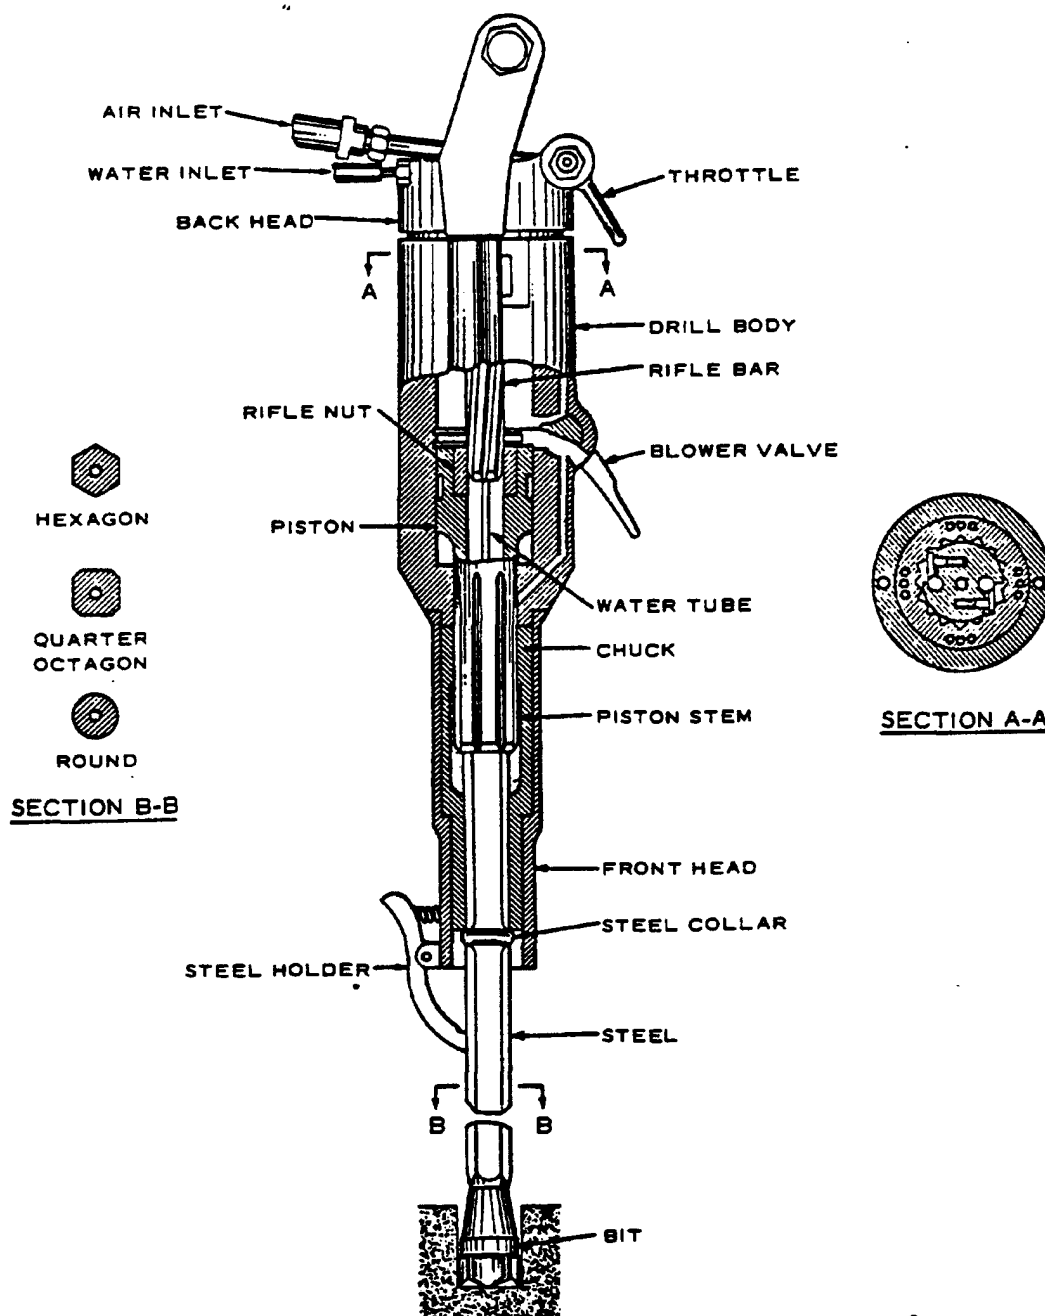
Typical surface jackhammer drill design<sup>9</sup>
